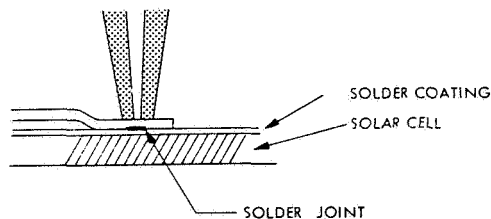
Parallel Gap Soldering (Ref. 10.4-3)
